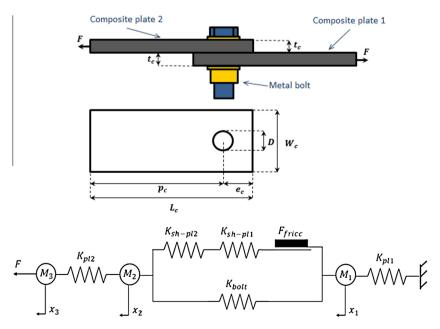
Geometry and mass-spring model of a single-lap composite bolted-joint.
